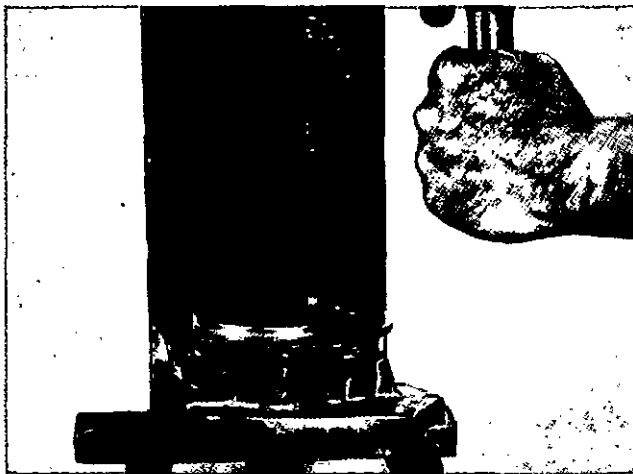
, (F543). Install the inside oil seal in the drive cover.
